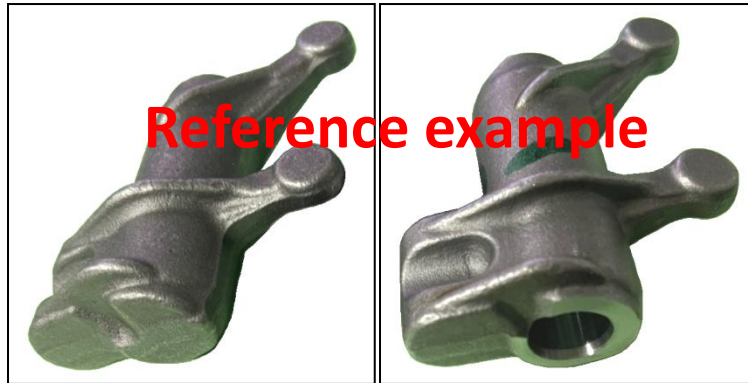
Engine valve rocker arm, pre-machining (left) and post-machining (right)
